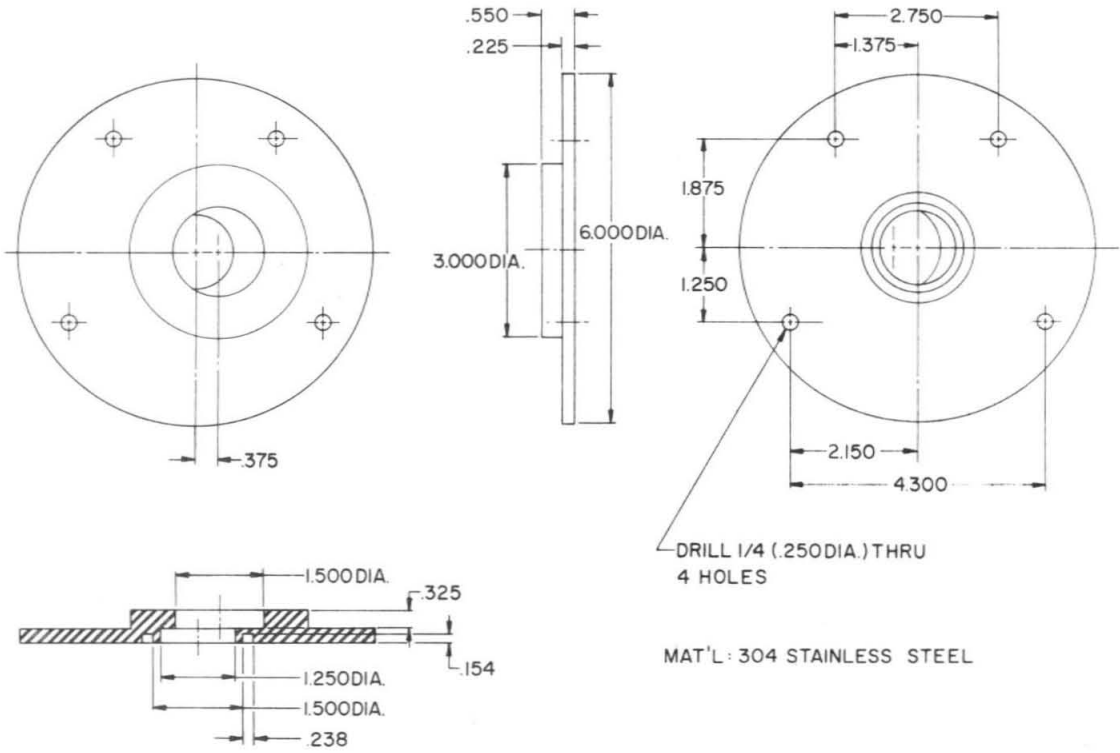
Drawing showing photographic plate holder. Dimensions are in inches.
